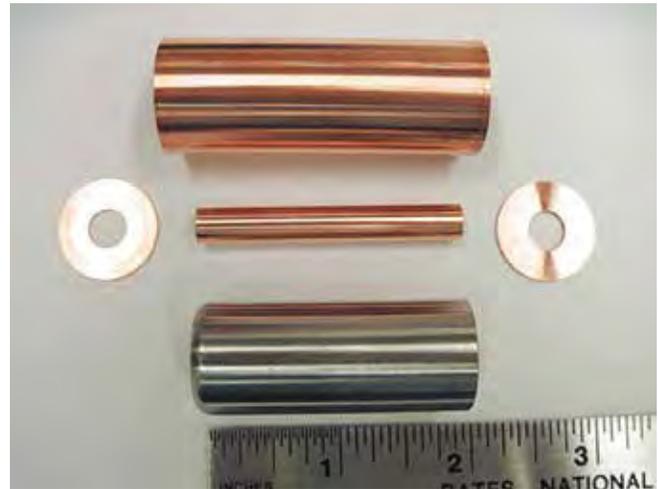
Machined Components Ready for Assembly and Second Stage Extrusion
